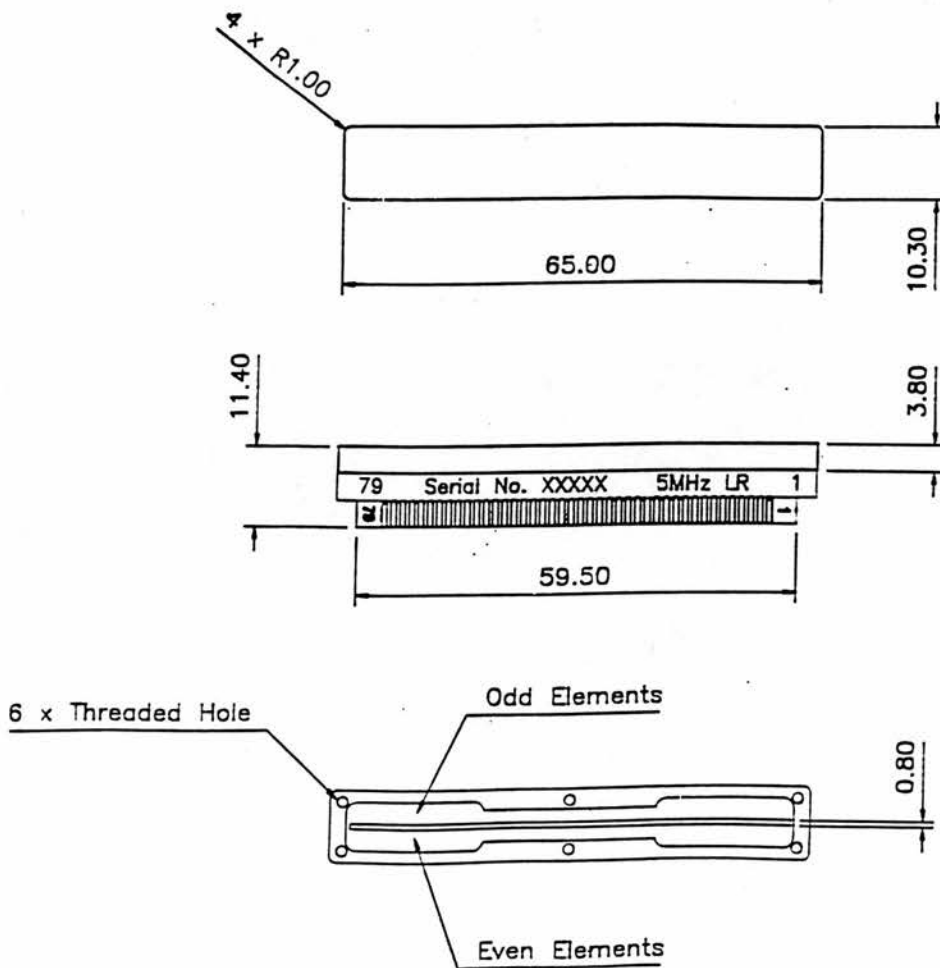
The mechanical drawing of a 5 MHz linear array.
